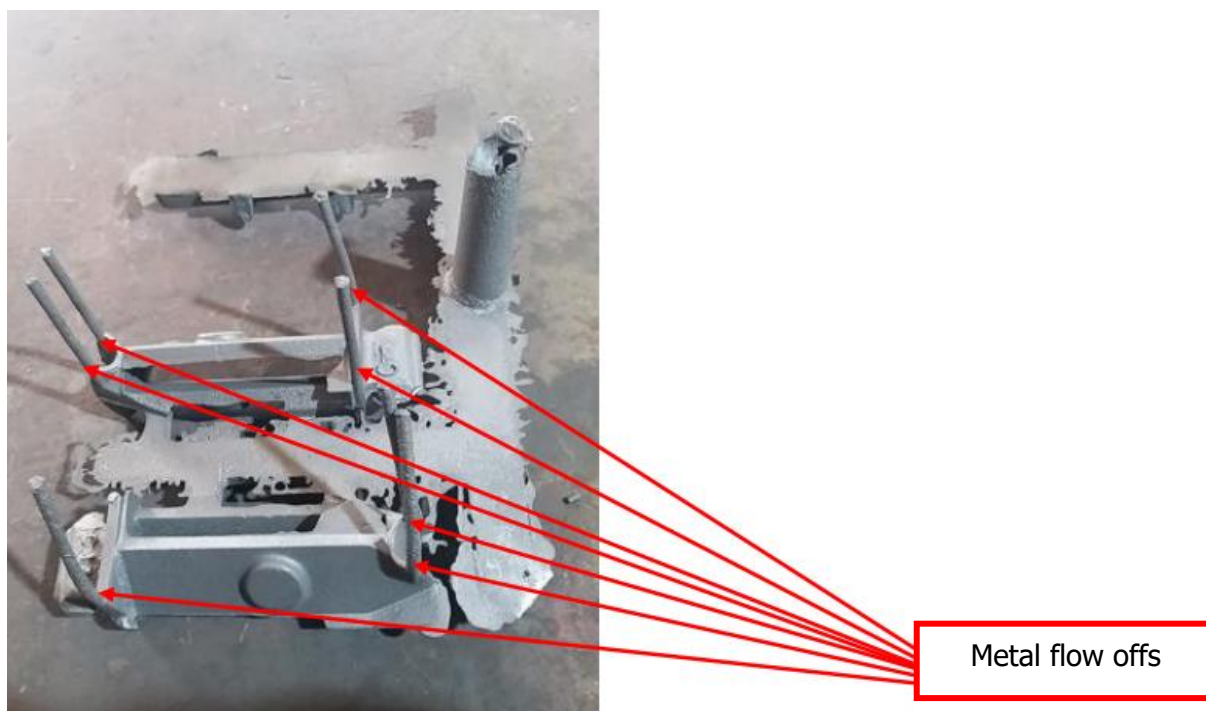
Illustrates the areas and sections to be cut off by the supplier.
